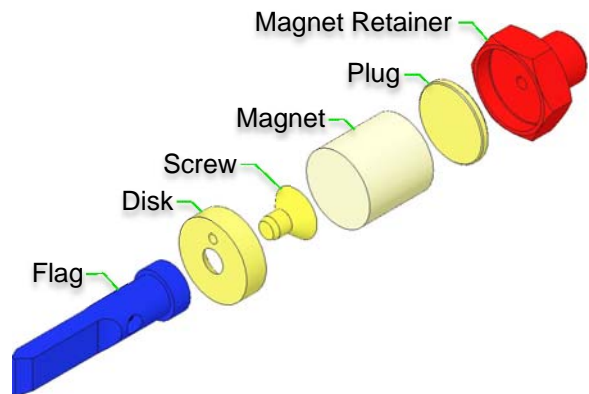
HLTS BOSEM Magnet/Flag Assembly
